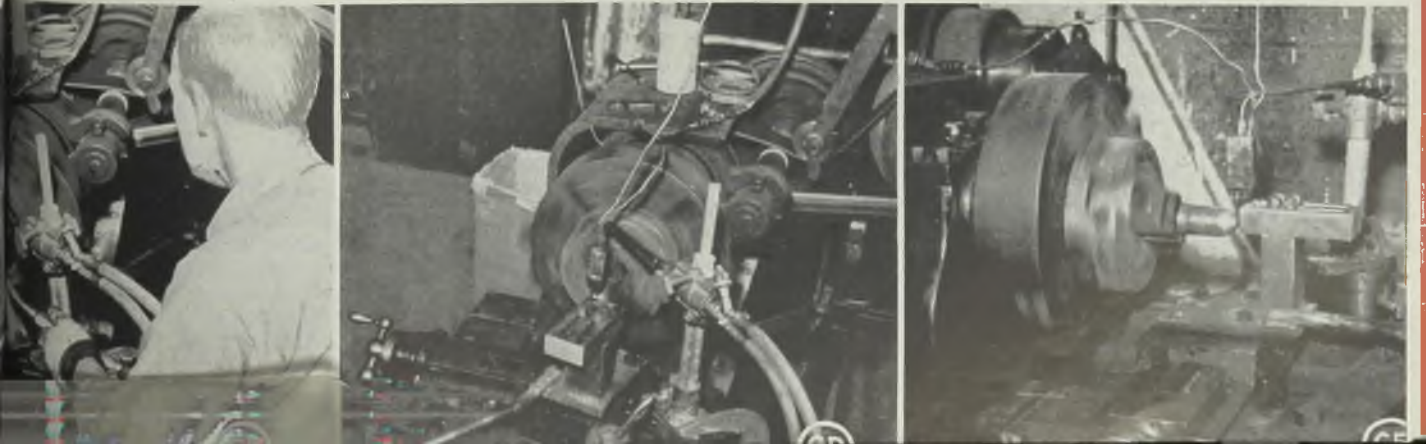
Forming tools used on lathe in flame-spinning process. "A" and "B" are used in forming the unit shown in Fig. 1. "C" is a flat-plate tool which is especially adapted for making hemispherical closures
